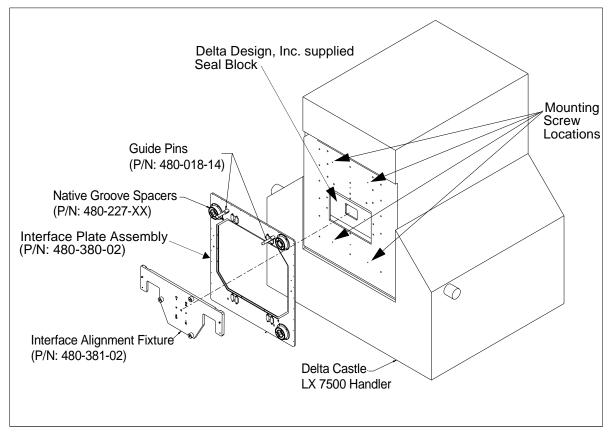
Interface Plate Assembly and Alignment Fixture Position
